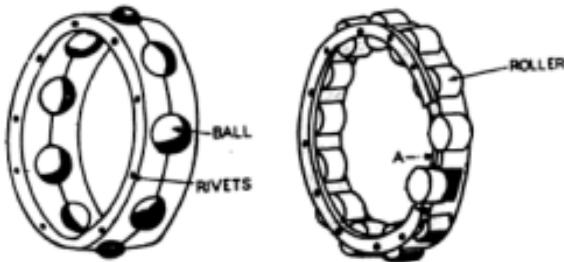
(a) Ball bearing (b) Roller bearing
